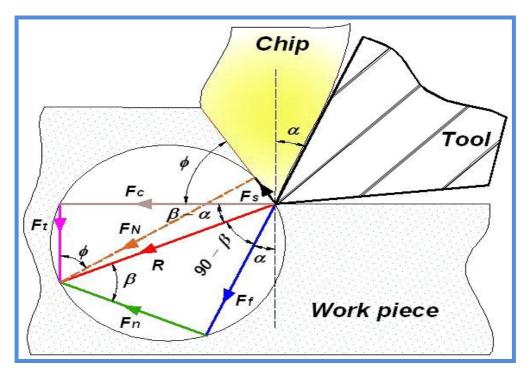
Orthogonal cutting showing the forces exerted on the Tool & Chip.
